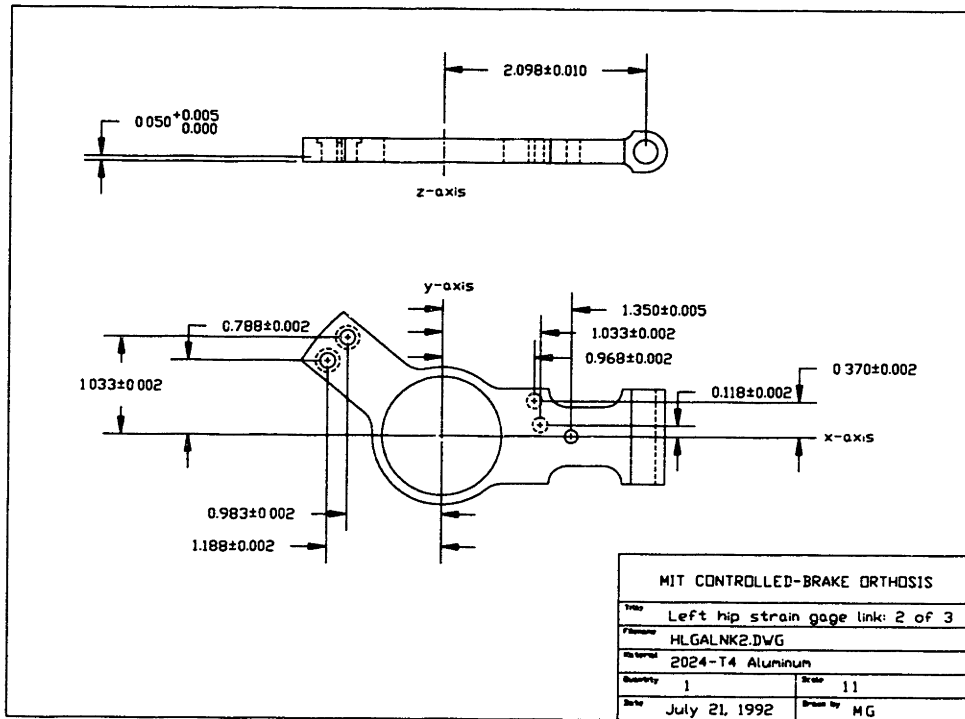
Link that couples left hip gear to the brace (drawing 2 of 3).
